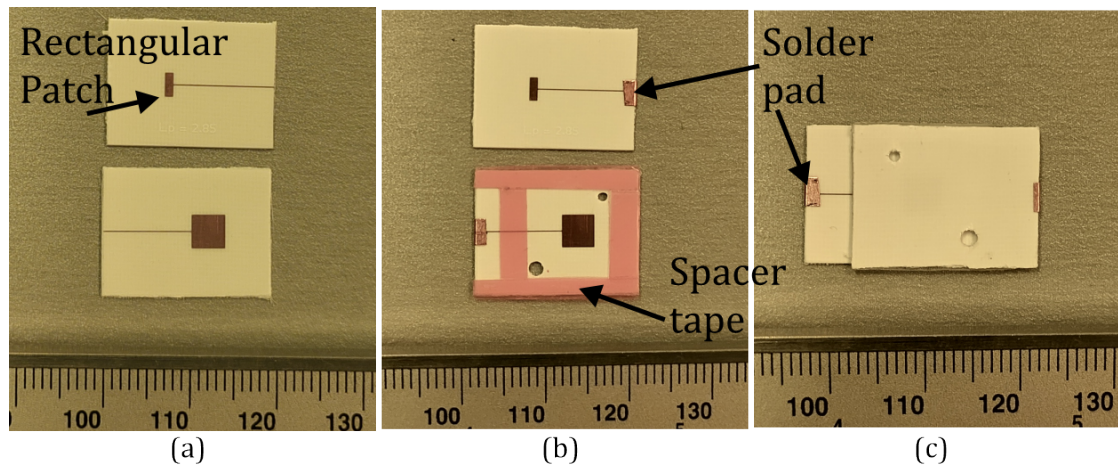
Photographs highlighting three key unit cell construction steps: (a) the rectangular patch and ground plane PCBs, (b) the filling holes, soldering pads and spacer tape added, and (c) patch and groundplane substrates combined.
